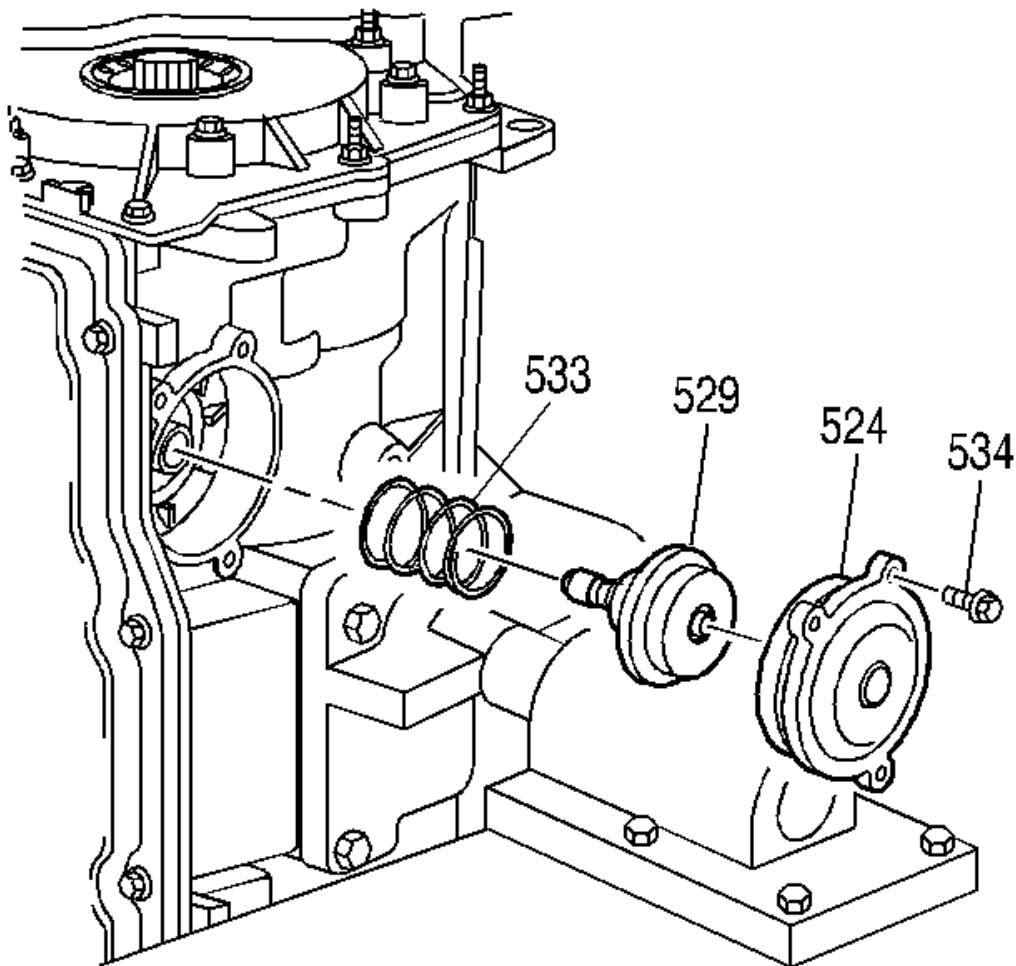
Identifying 4th Servo Piston Assembly And Cover
